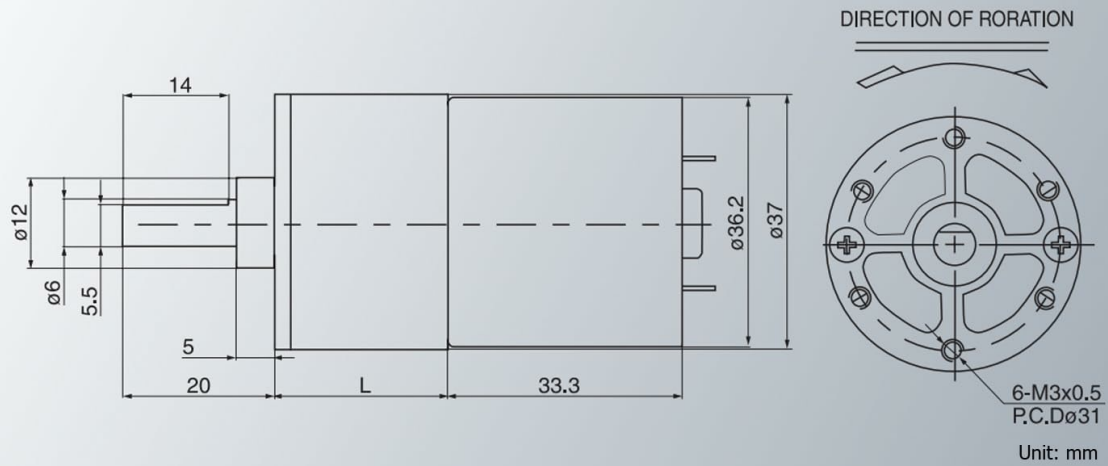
Greartisan GA37RG DC 12V 10RPM Gear Motor. This image shows the overall appearance of the gear motor, highlighting its compact design and robust construction.
